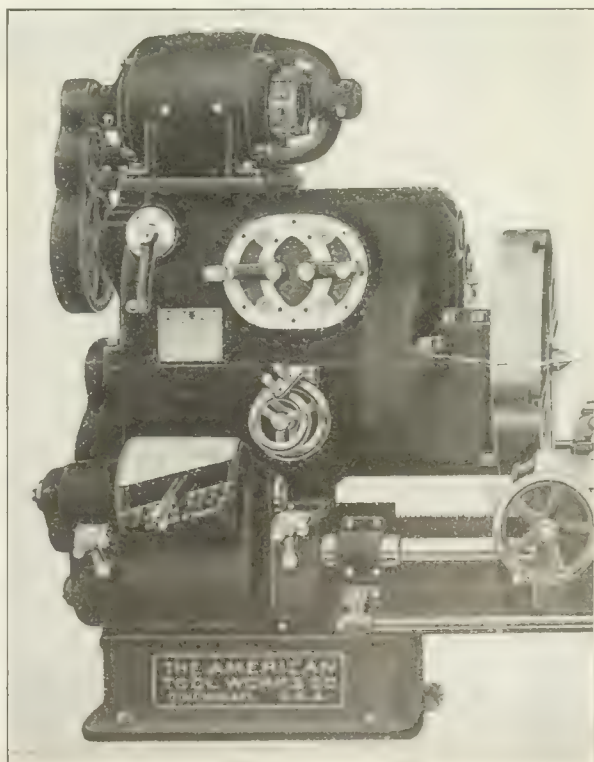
The 12-Speed Head Lathe with Motor Drive.
